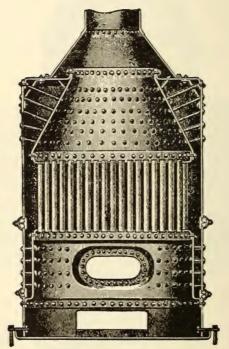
Vertical Marine Boiler, Showing Details of Bracing.
